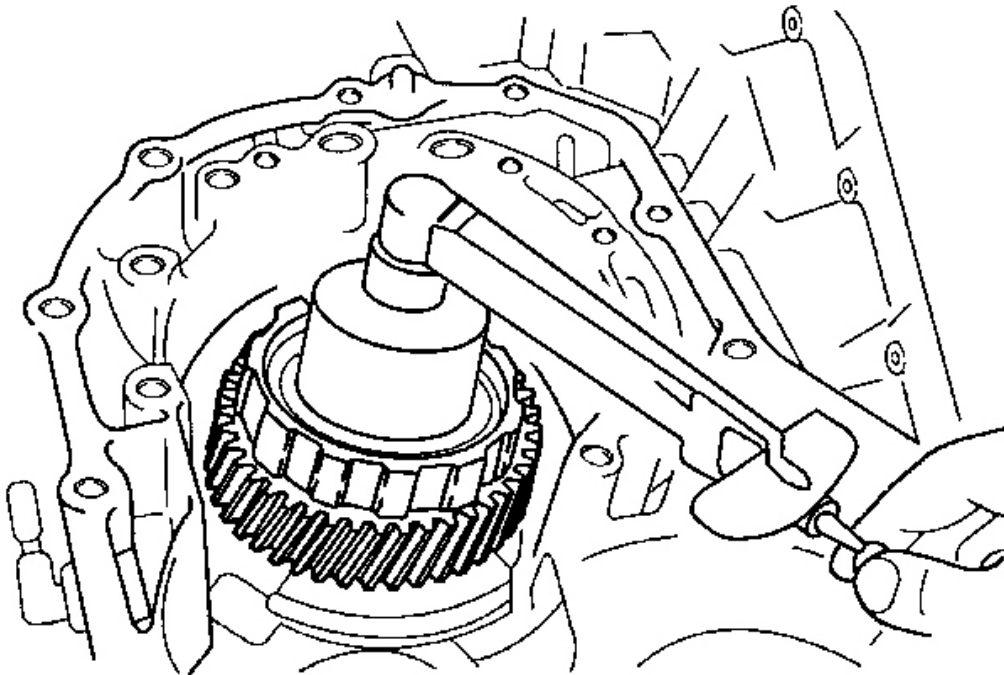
Turning The Counter Drive Gear Using A Wrench
